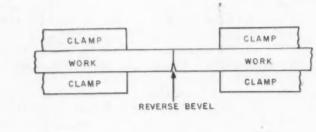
Drawing of reverse-bevelarrangement used in helium-shielded arc welding of magnesium. Drawing is exaggerated for illustration purposes.
